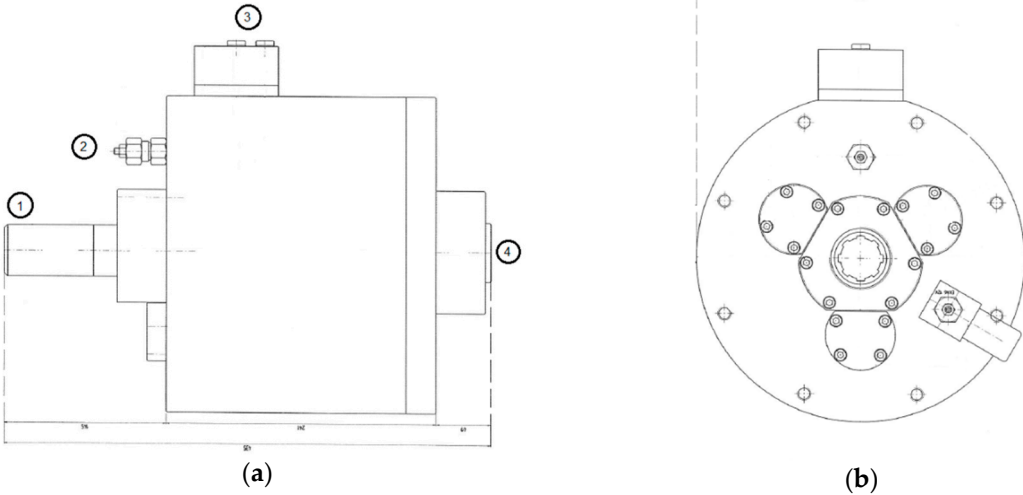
Device scheme: (a) Lateral view; (b) Frontal view. 1. PTO cardan shaft attachment; 2. main valve; 3. electric control; 4. connection to the wagon.
